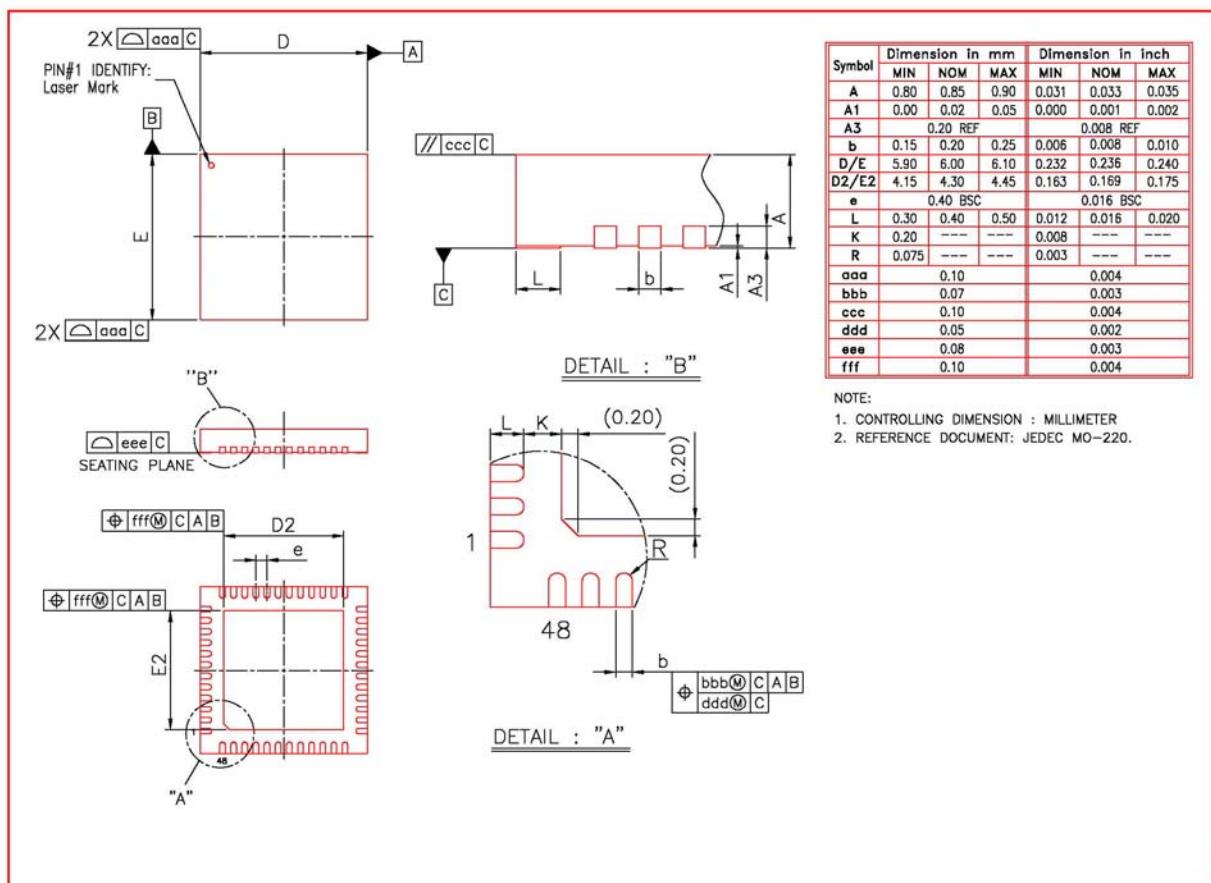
CW6633M 48-pin, 6 x 6 x 0.85mm, 0.4mm-pitch QFN Package Dimension
